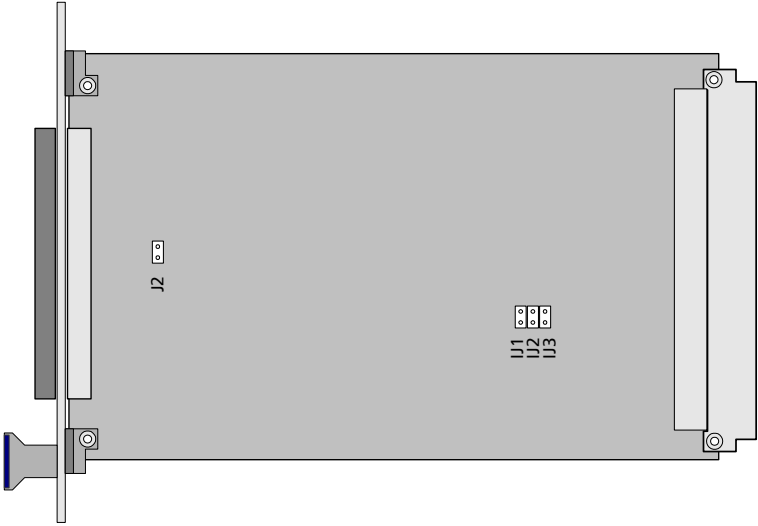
Position of the jumpers (board Rev. 1.0, component side)
